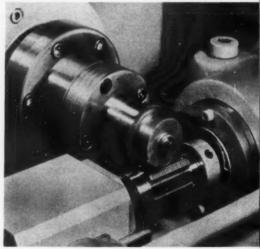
Precision 2, 3 and Ultra Precision gears are hobbed on a "floating" type arbor.
